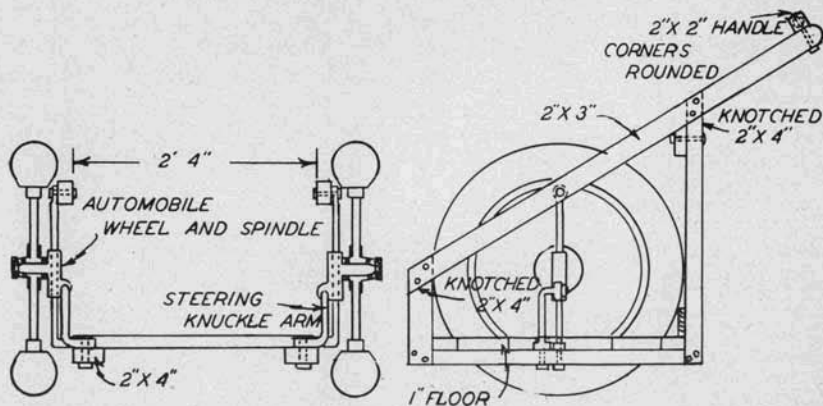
Farm-made milk can cart. (Plan .7521-2)
